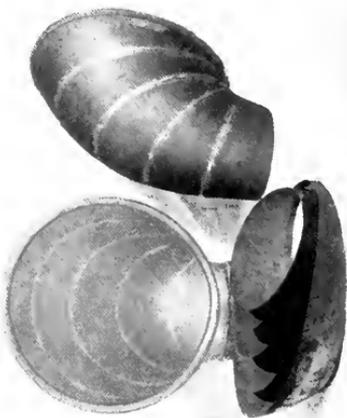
Ventilation Cowls, the Sections of which Are Electrically Welded Together
